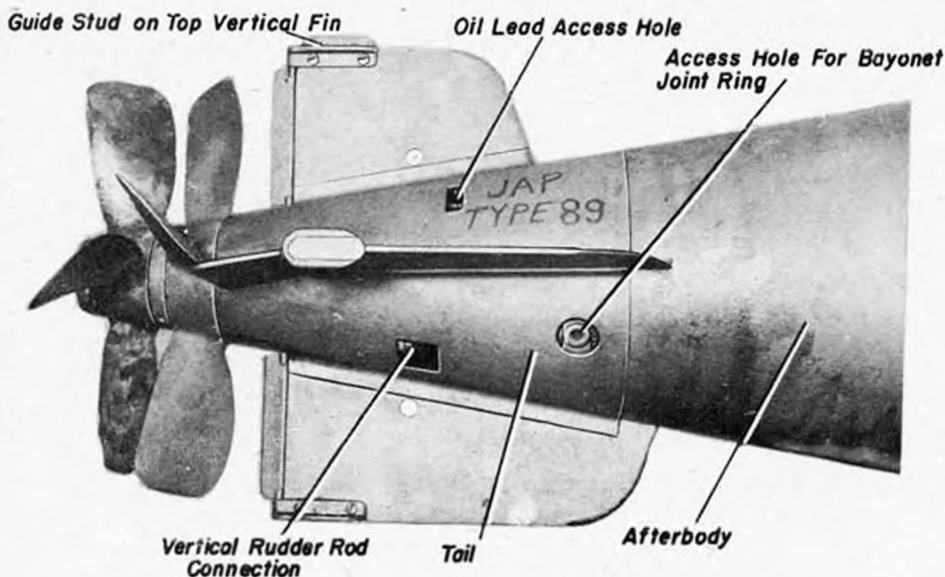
Torpedo Type 89 Mod 1, Tail Section
